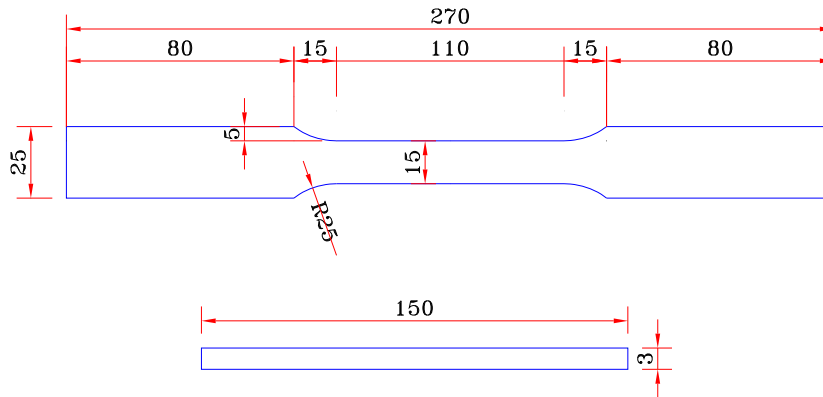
Typical dimensions of tensile coupons (dimensions in *mm*)
